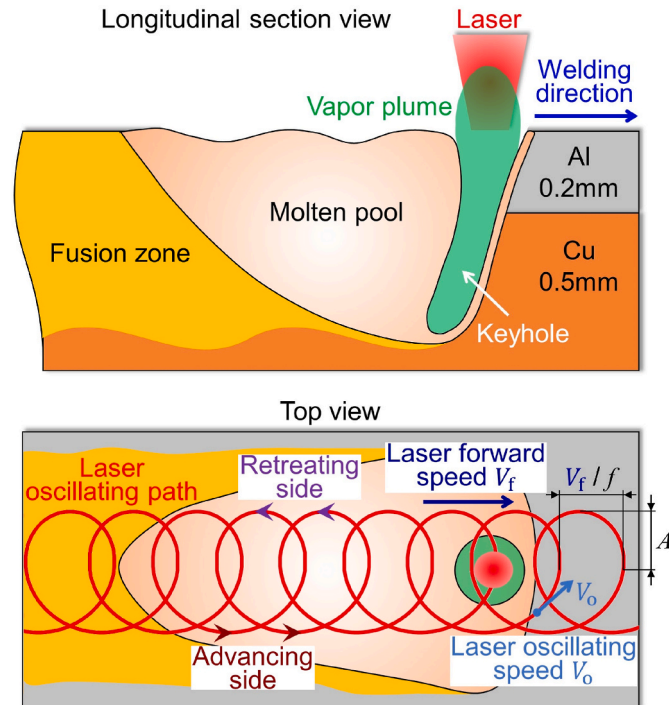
Schematic of oscillating laser welding for Al-Cu lap joints.
